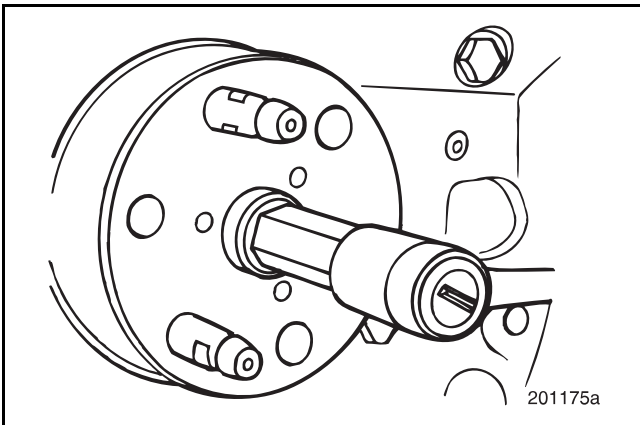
Crankshaft Wear Ring (with Double-Lip Teflon Seal) Installation Using J 35529
